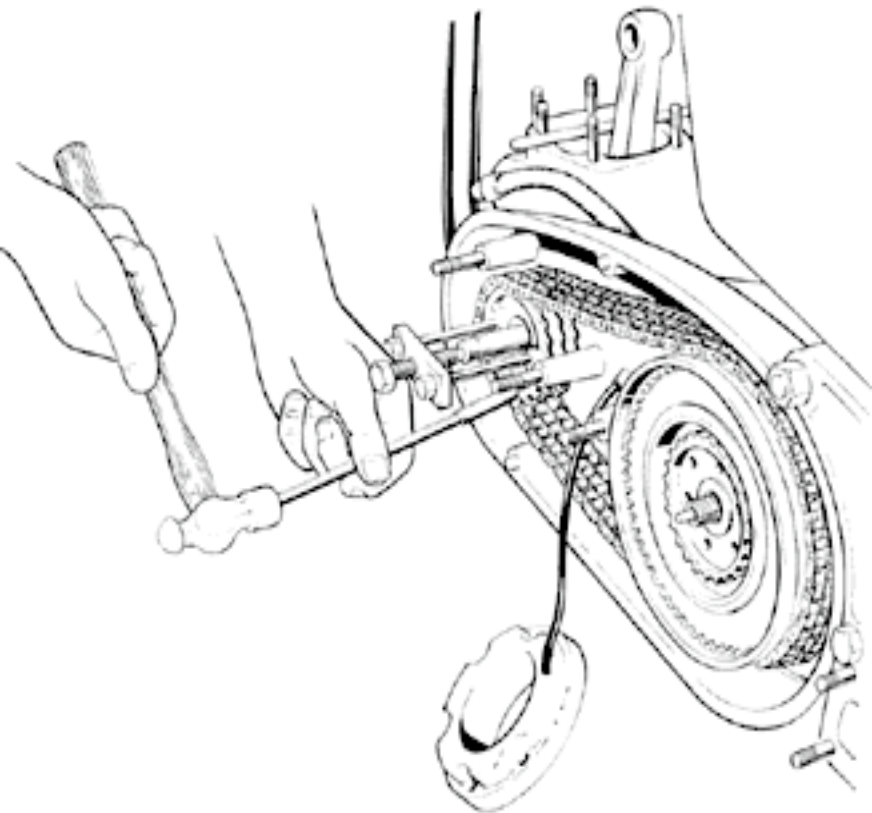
Using a screwdriver blade to peel circlip away from housing
